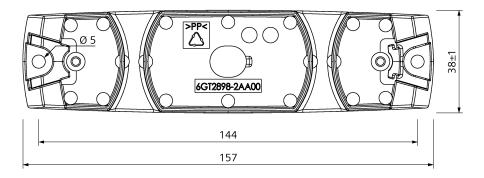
Dimension drawing spacer for SIMATIC RF620T
